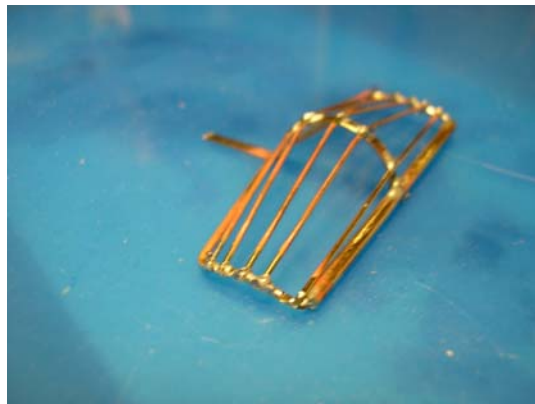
A completed frame assembly after cleaning and with the ends filed smooth.
